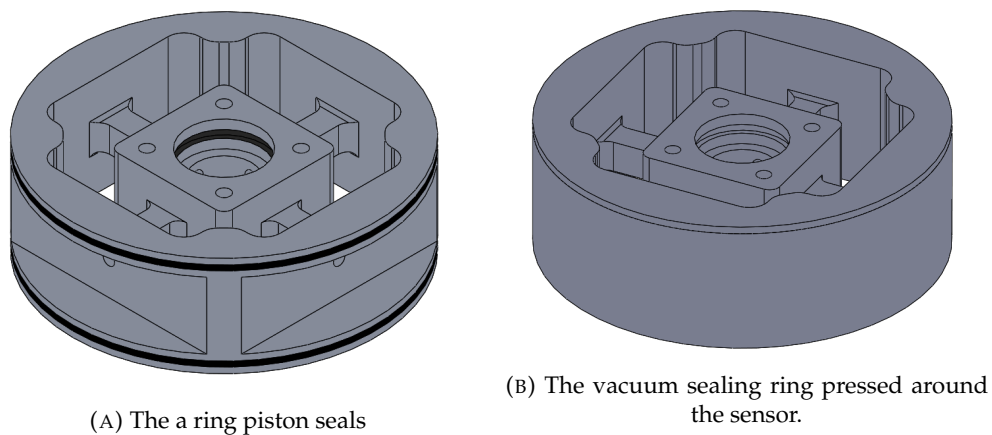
The addition of a vacuum sealing ring using two piston seals. This vacuum sealing ring ensures no unwanted opening for the air flow.
